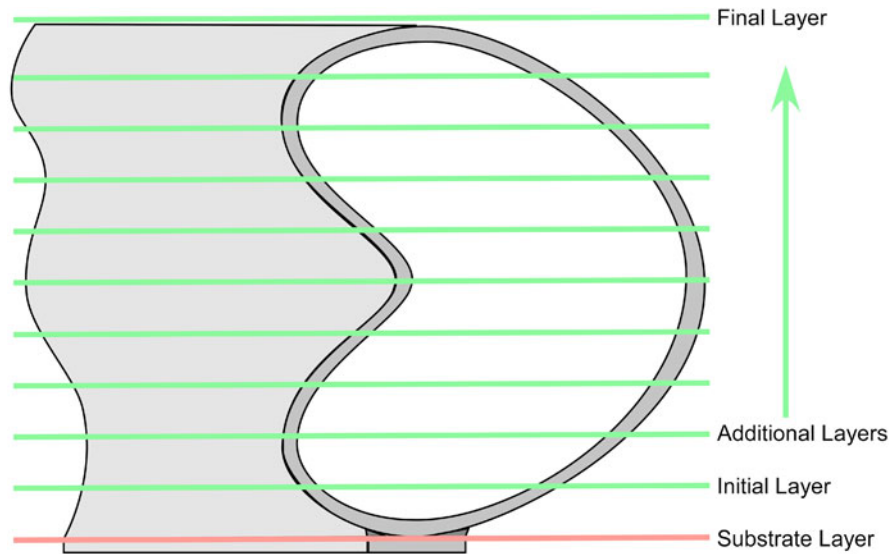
The coil structure fabrication will initially deposit material on a base substrate. Fabrication will build up layers to the top of the structure for complete closeout.
